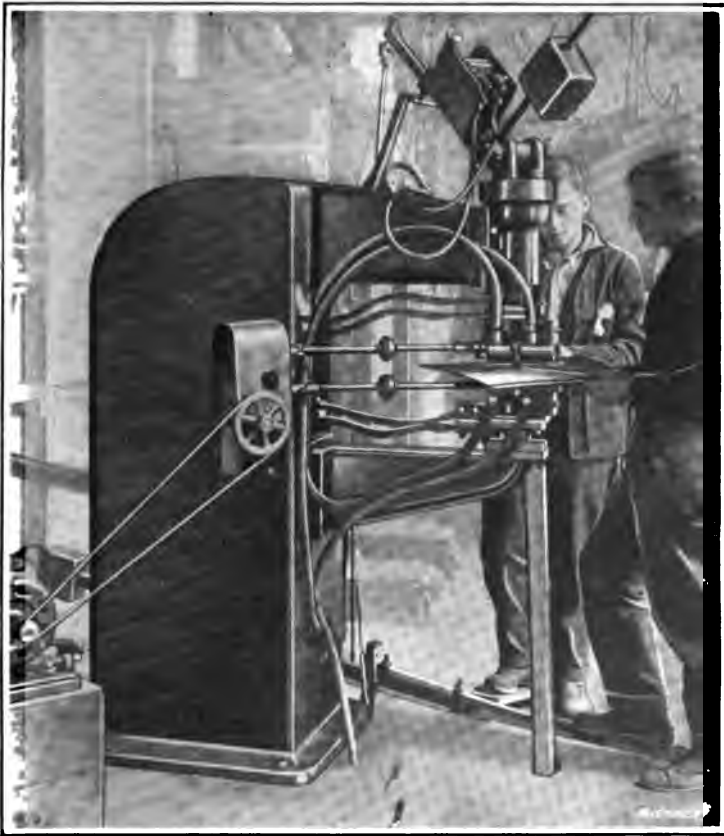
Special Electric Seam-welder used for Welding Sheet Steel of Light Gage
